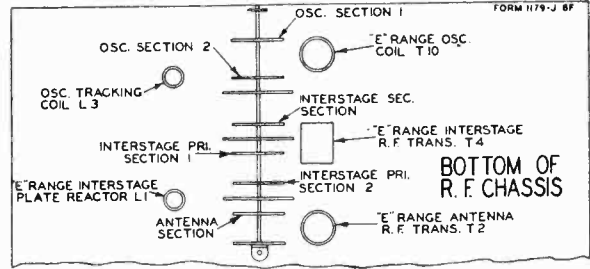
Bottom View of Chassis Showing Coil and Switch Section Location
